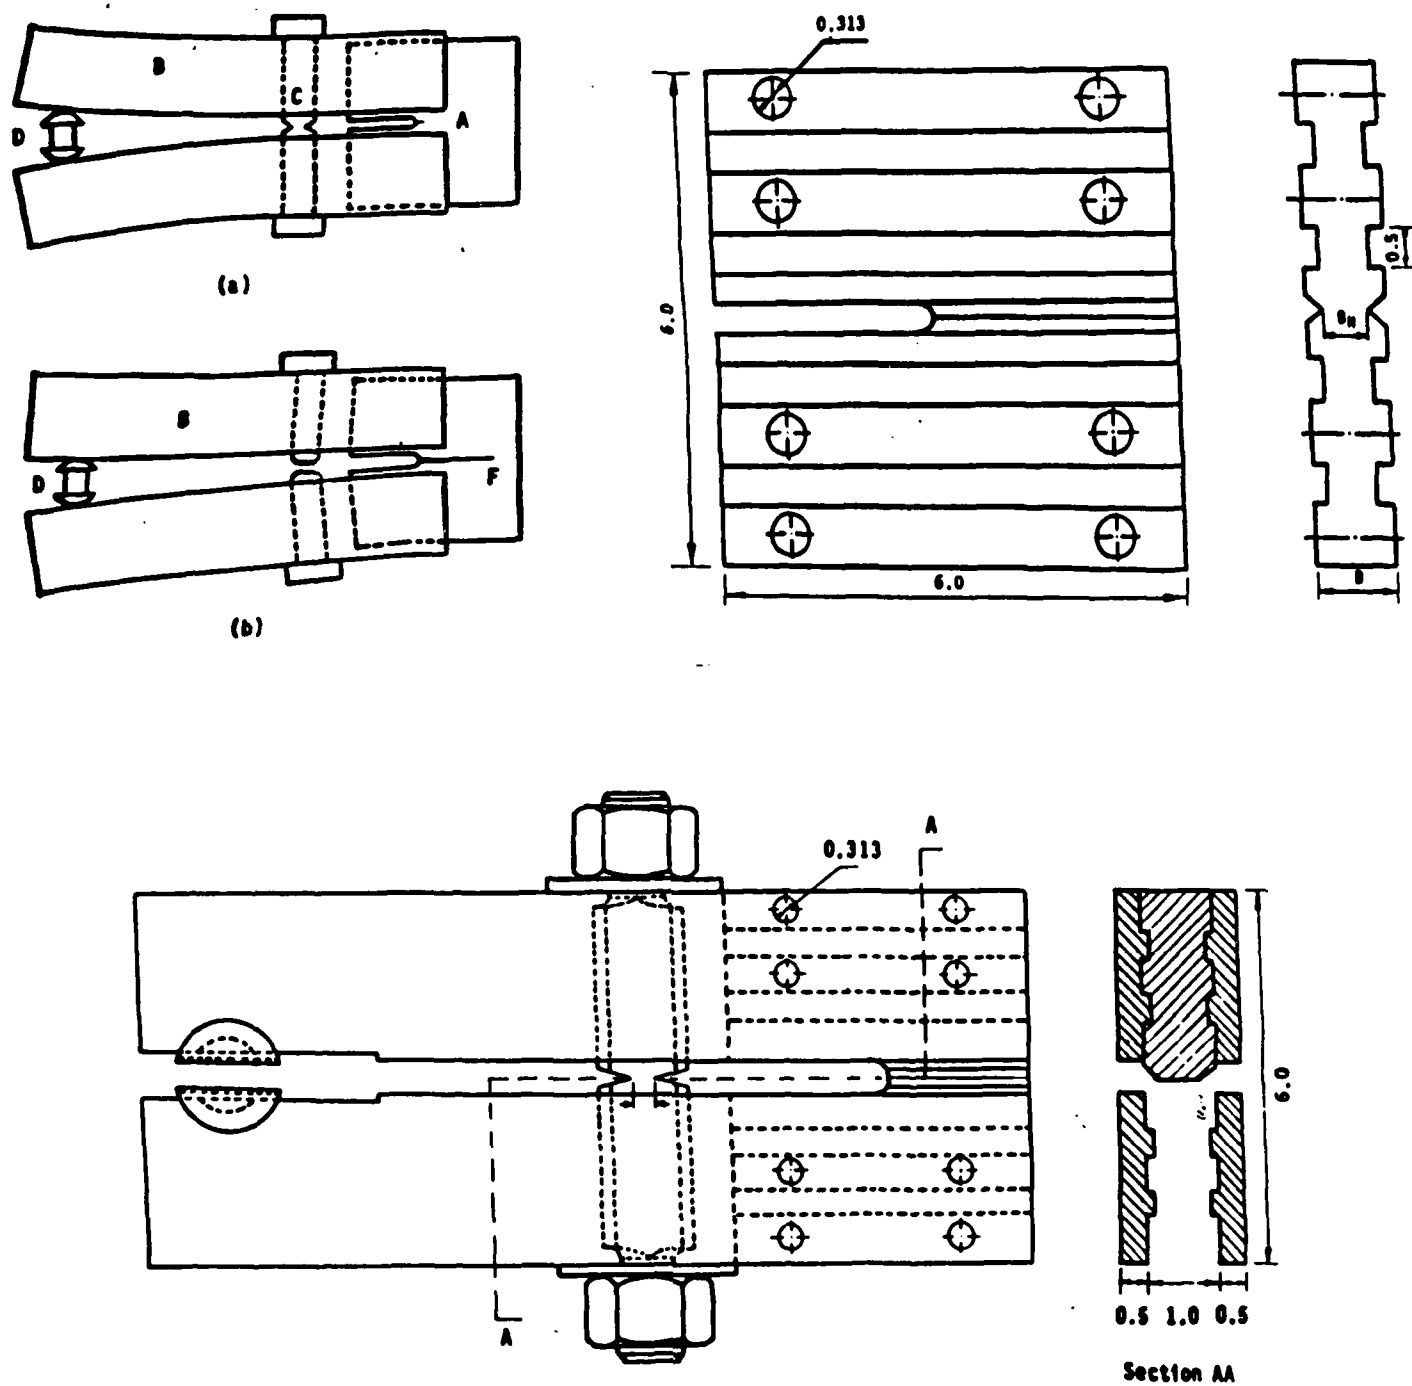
Fast fracture device: (a) and (b) schematic drawing of operation, (c) test specimen, and (d) details of assembly.
